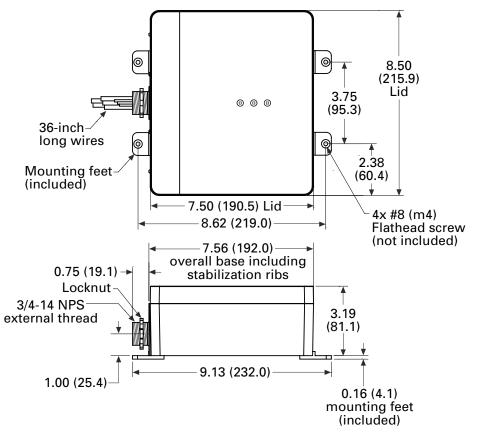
P2 enclosure, NEMA 4X with mounting feet dimensions, weight = 4 lb
